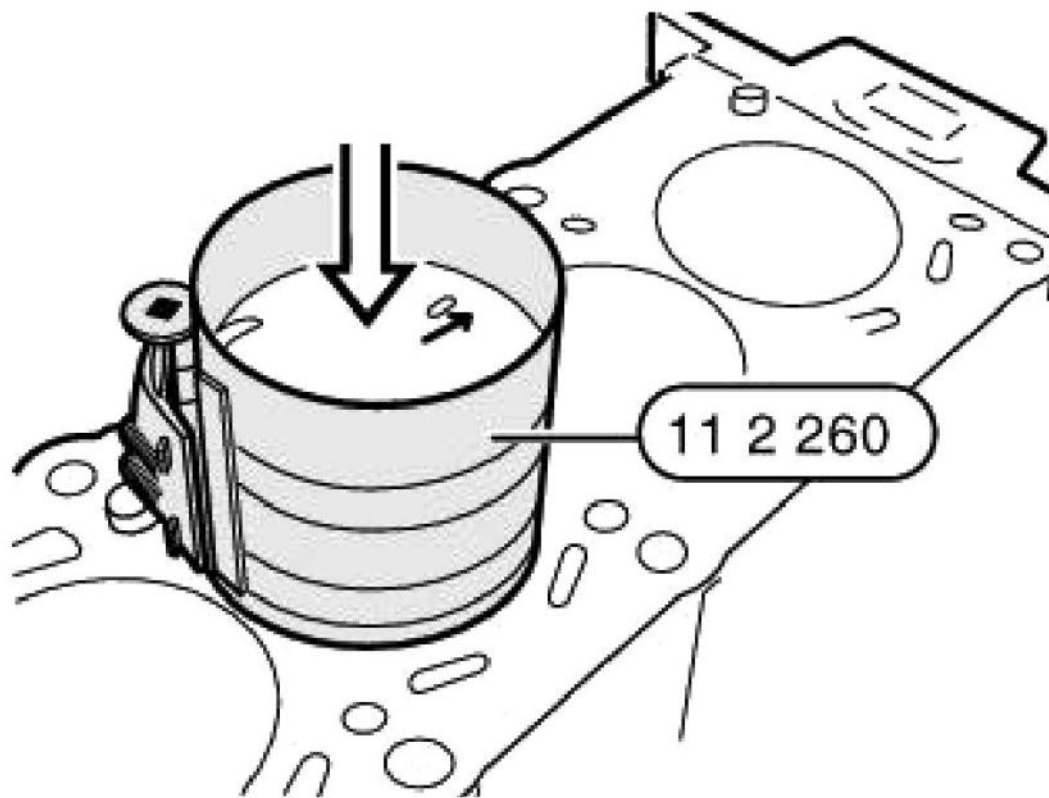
Pressing Together Piston Rings With Special Tool 11 2 260
